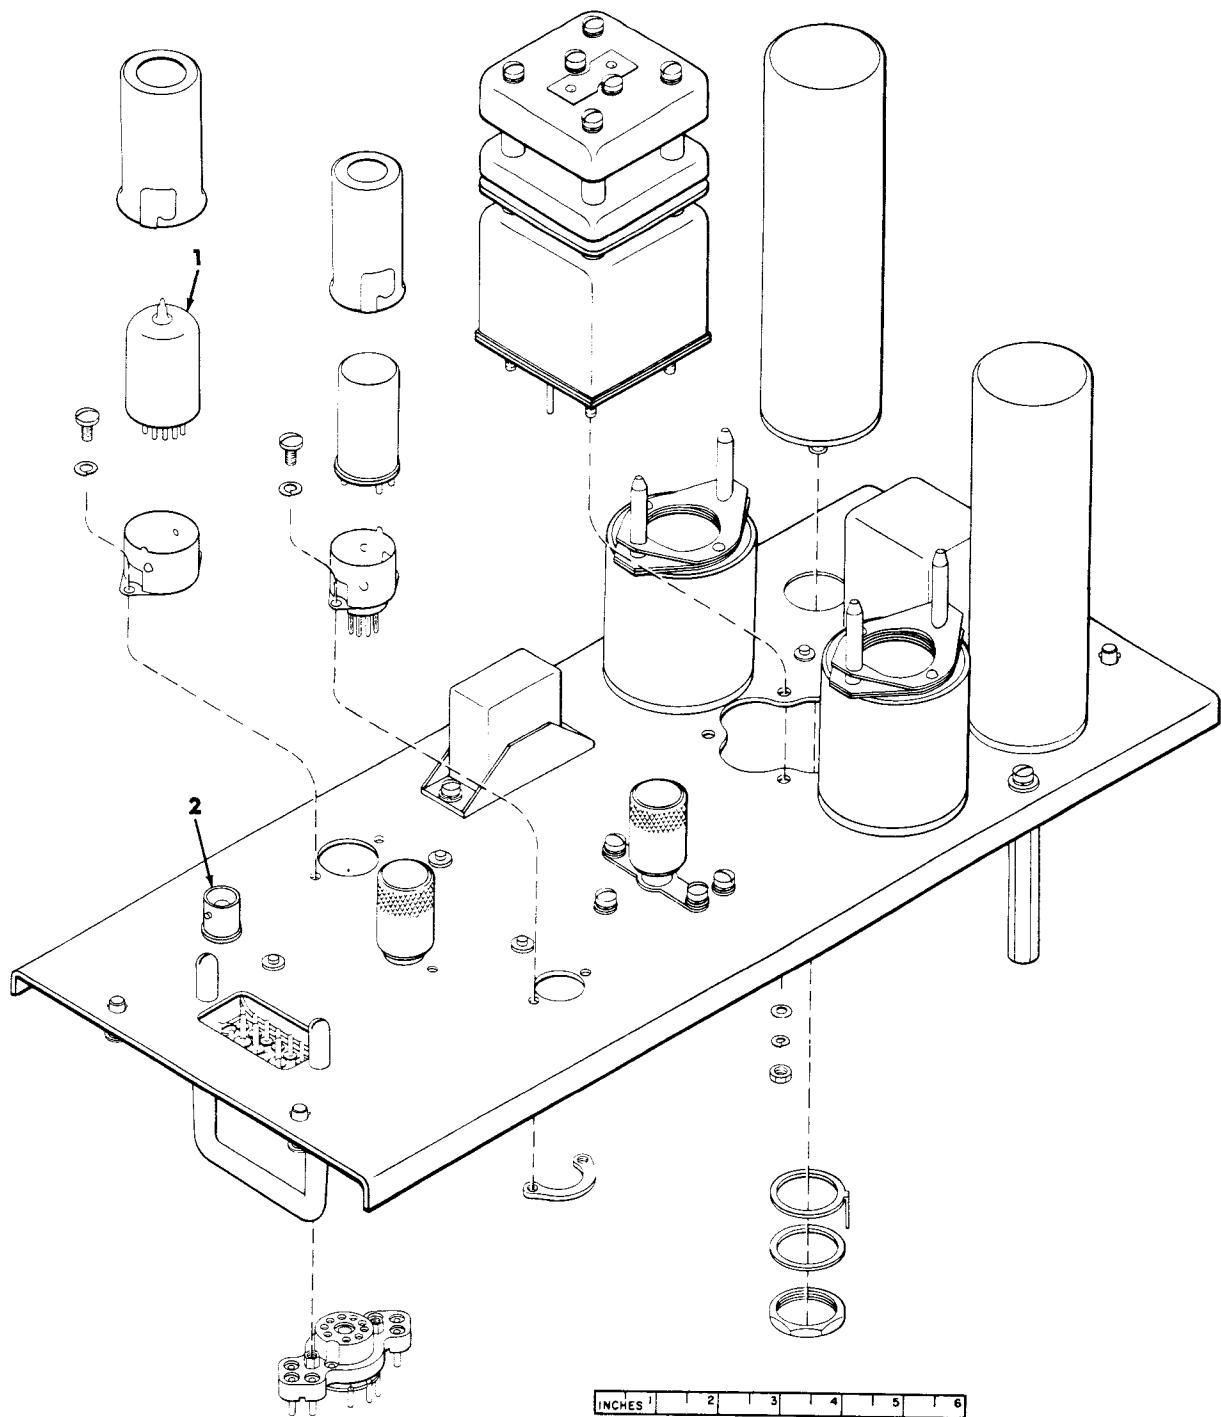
Generator, pulse Q-324/M (8007726) - partial exploded view
